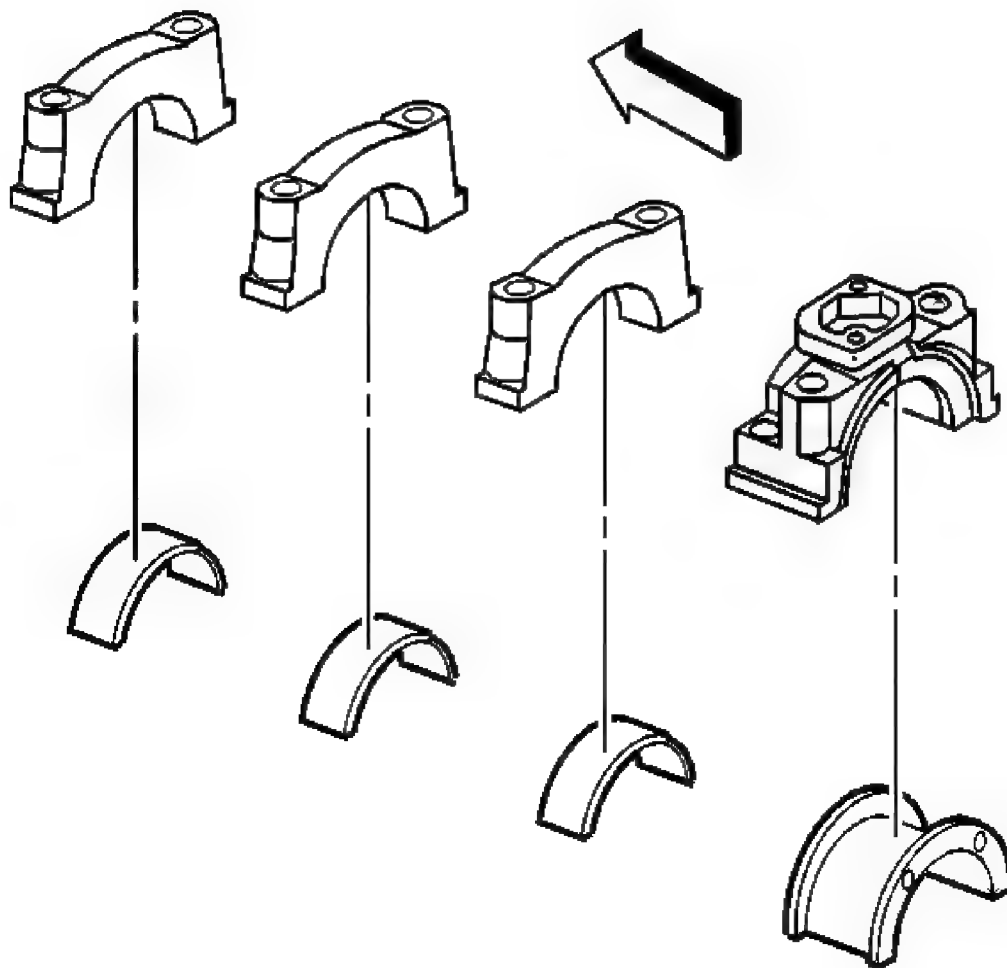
View Of Crankshaft Bearings & Crankshaft Bearing Caps
